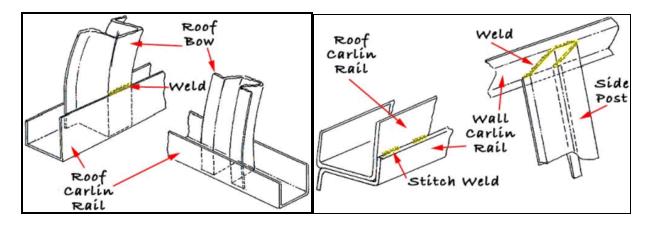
Location of Weld between Roof Bow and Roof Carlin Rail and Location of Weld and Stitch Weld between Side Post and Roof Carlin Rail
